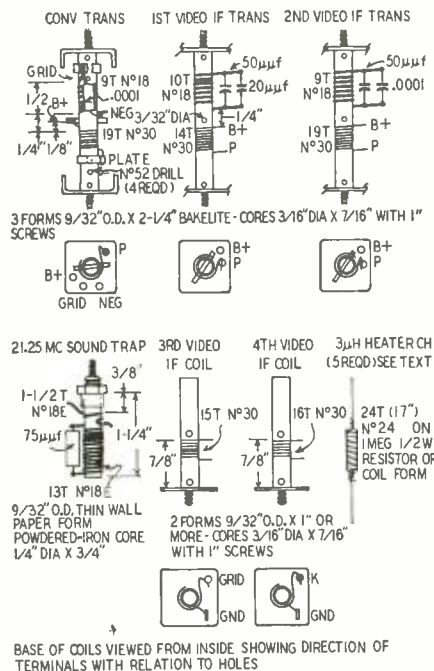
i.f. transformers and coils are wound as indicated in drawings.
